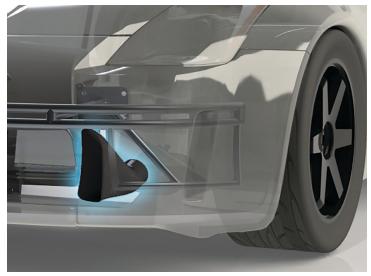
The composite brake duct produced using FDM sacrificial tooling draws air from the front of the car and routes it to the brakes.
